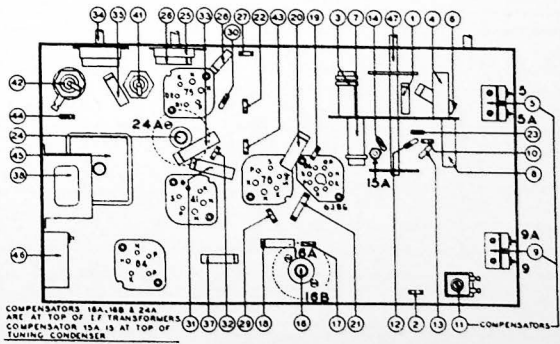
PART LOCATIONS, UPSIDE OF CHASSIS.
